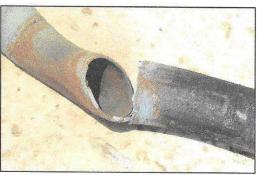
The natural gas line has dislodged from its support structures (black pads and rooftop rollers); fracture at a welded 90° elbow.
